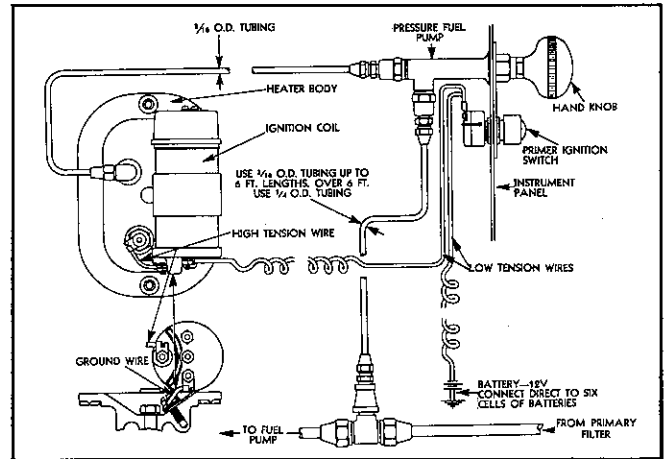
Air Heater Wiring Diagram and Fuel Connections.
